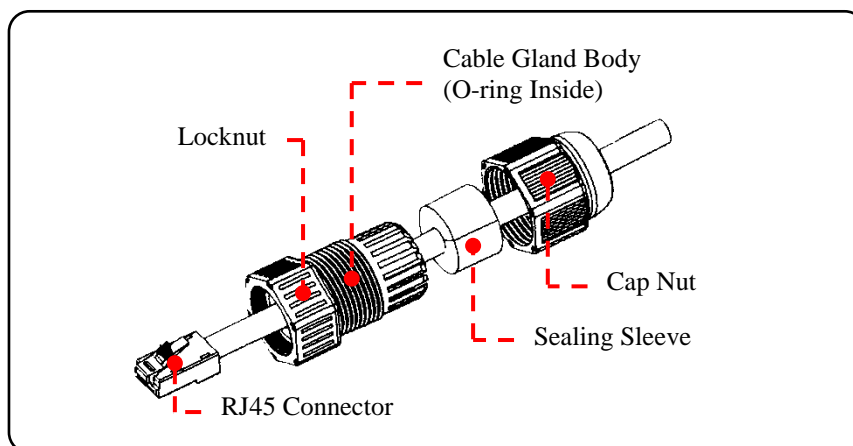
Ethernet Cable Feed Through Cable Gland
